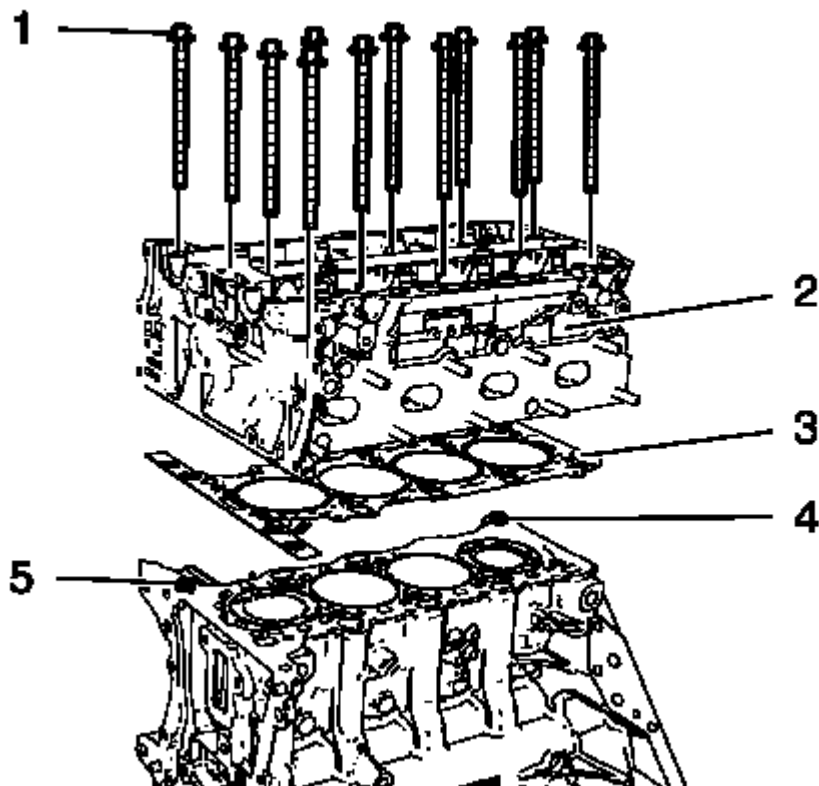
Cylinder Head, Cylinder Head Gasket, Cylinder Head Bolts And Guide Sleeves
